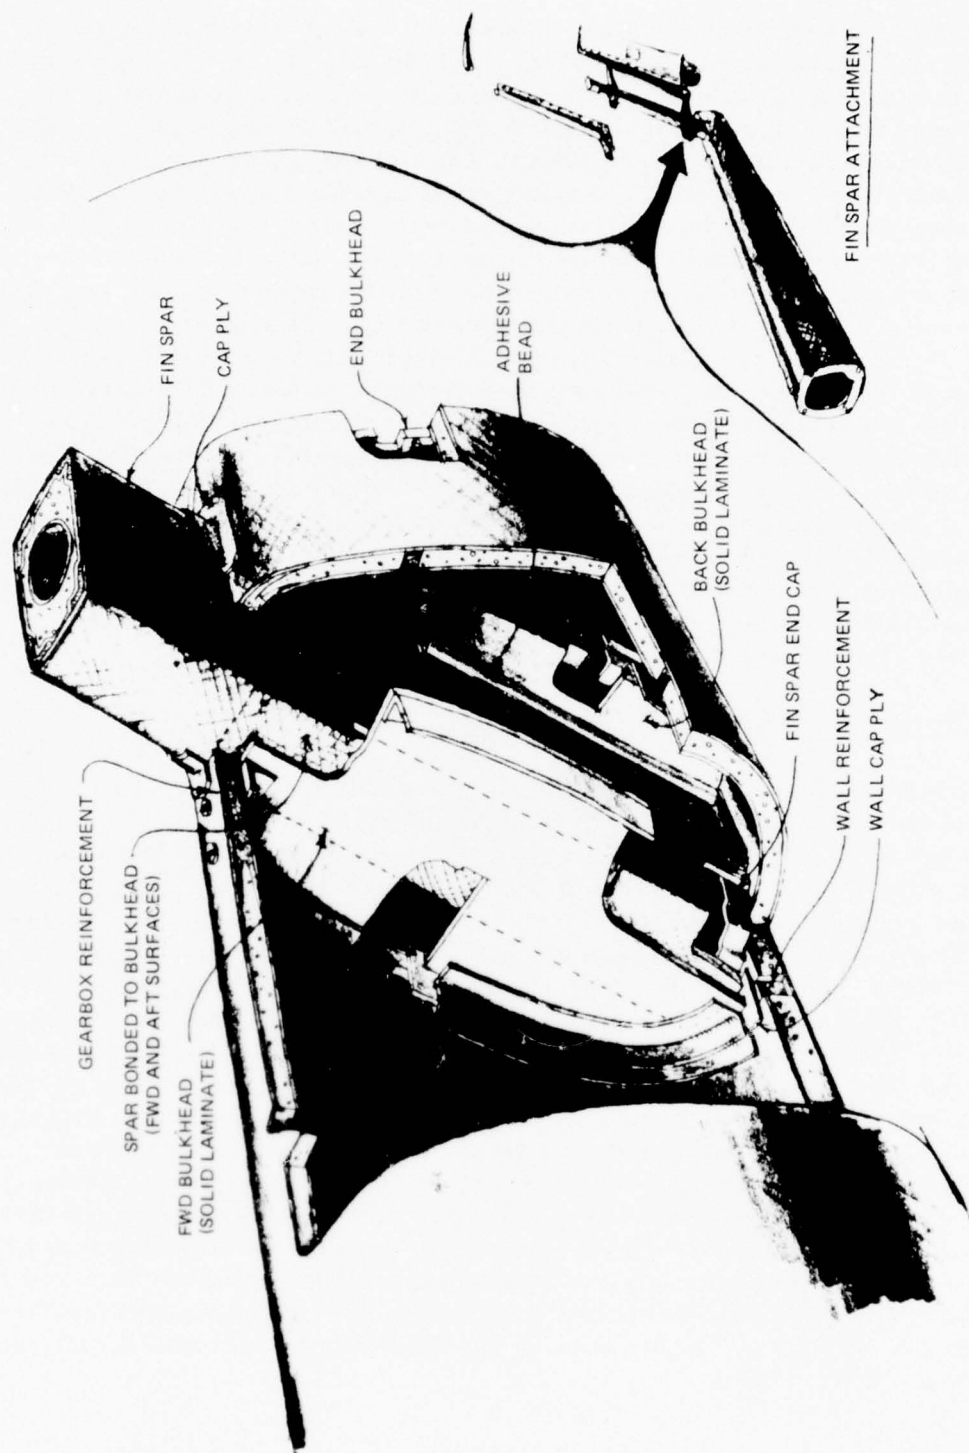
Composite Tail Boom Fin Spar to Boom Assembly.
